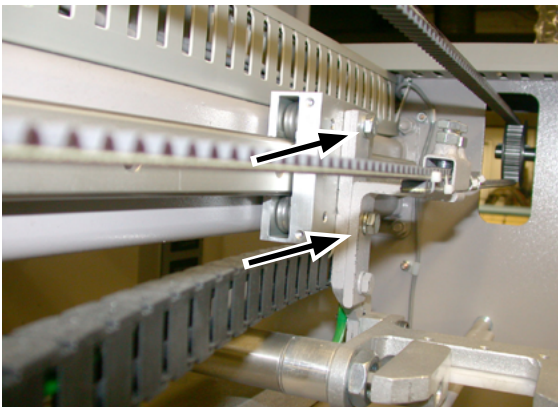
After removing these bolts, let the spreader clamp carrier assembly rest on the air foil.
